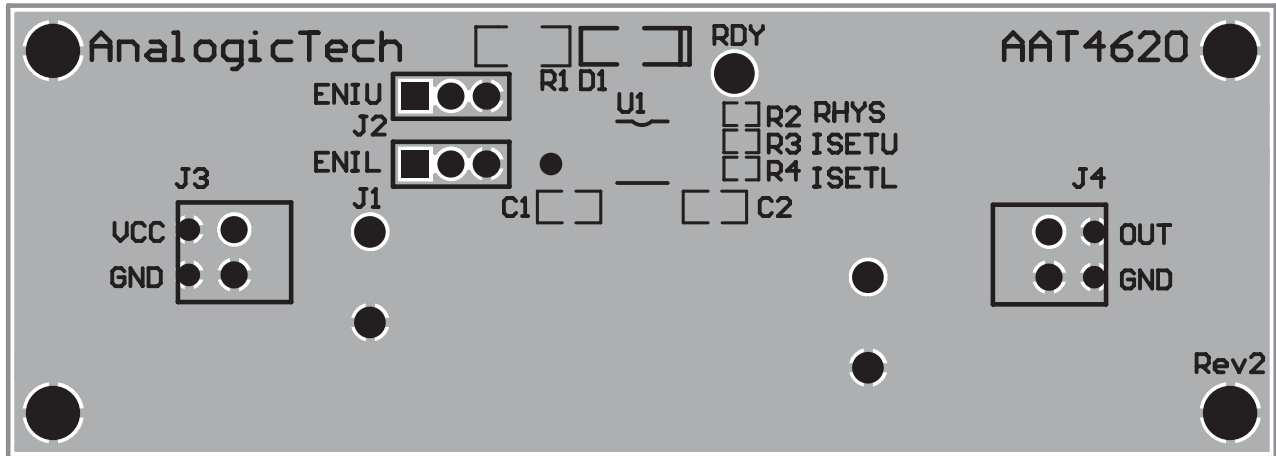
AAT4620 Evaluation Board PCB Bottom Side.
